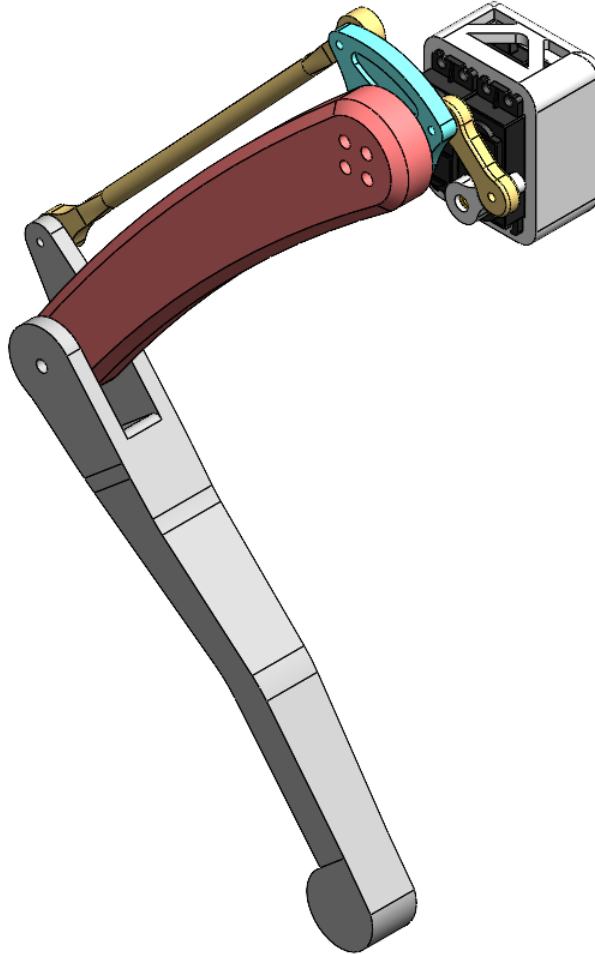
Individual Leg Assembly Showing Parallelogram Linkage Mechanism
